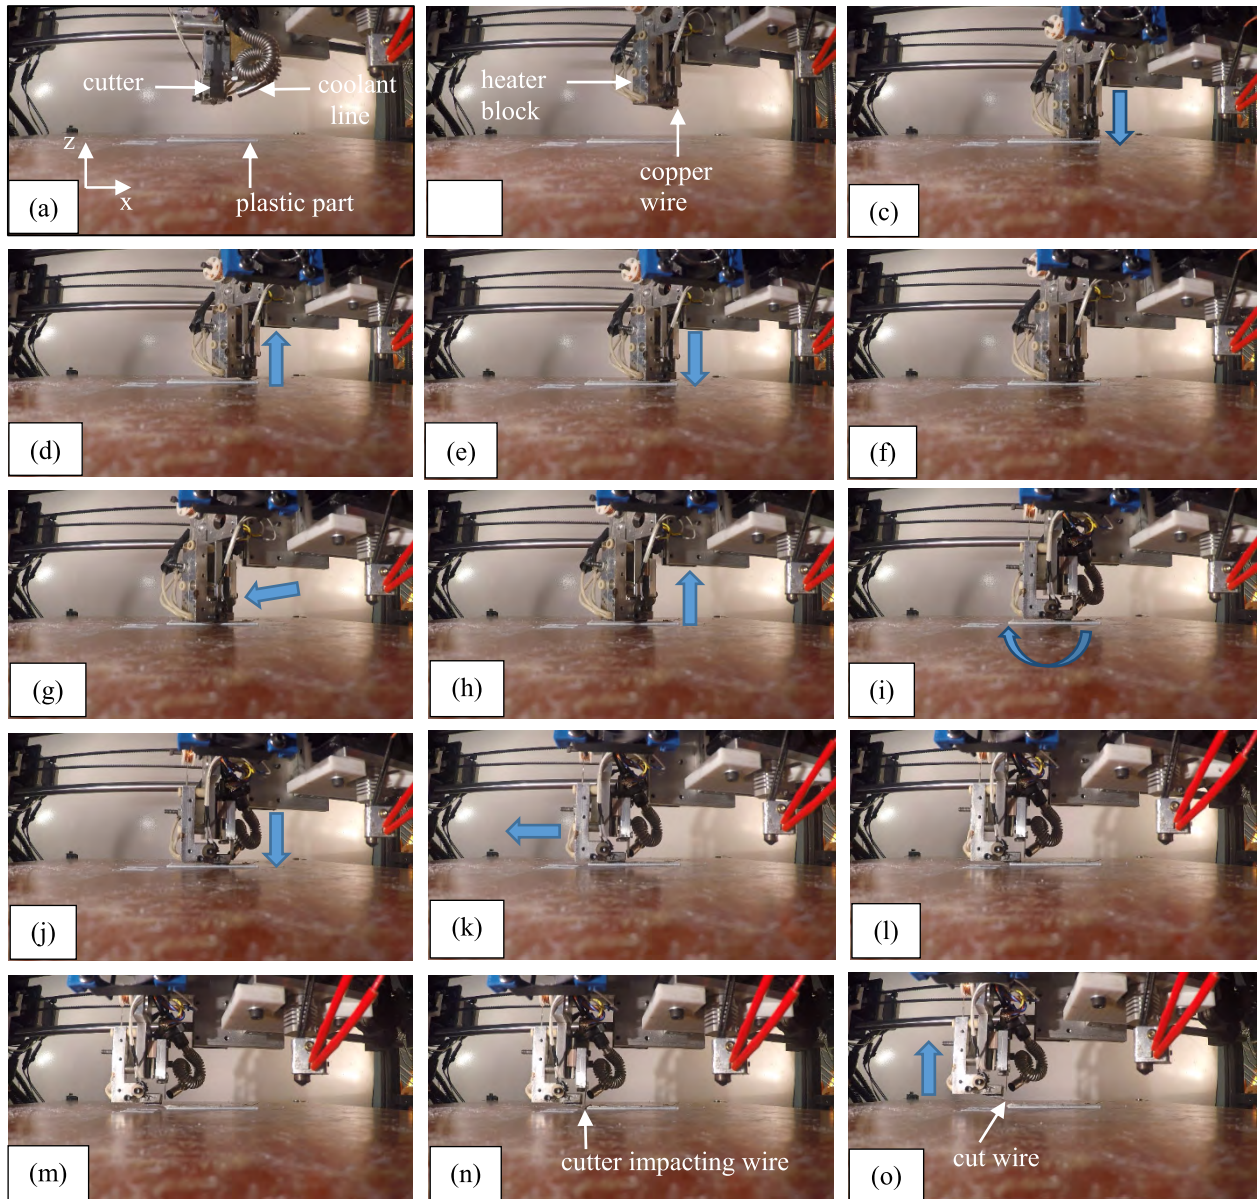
Sequence of steps for embedding a two-segment trace with a continuous copper wire into an ABS part; a) tool approaching the part, b) rotating tool, c) staking the wire into the polymer, d) retracting tool and supplying coolant, e) making contact with polymer, f) traversing the tool in the trace direction, g) traversing the tool in the trace direction, h) retracting tool and supplying coolant, i) rotating the tool, j) making contact with the polymer, k) traversing the tool in the trace direction, l) retracting the tool and supplying coolant, m) moving the tool away from cut location, n) cutting the wire, o) retracting the tool.
